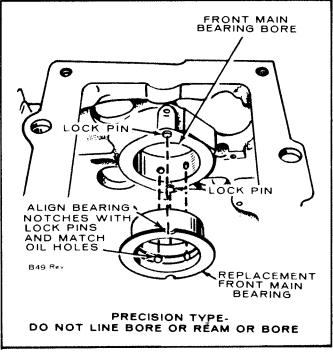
FRONT MAIN BEARING INSTALLATION
